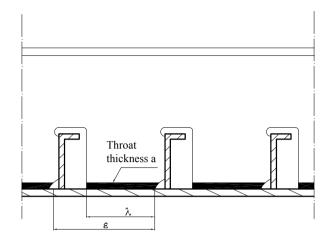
Continuous fillet welding between cutouts
